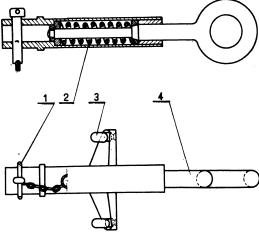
LUNETTE — 76 mm MOUNTAIN GUN M 48 B-1A1 - I
